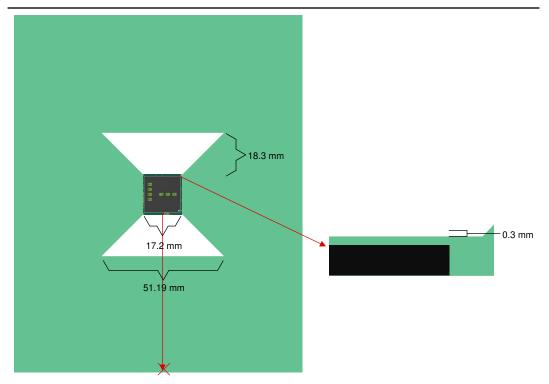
Large form factor board with trapezoidal cutout and PCB edge less than 0.3mm
